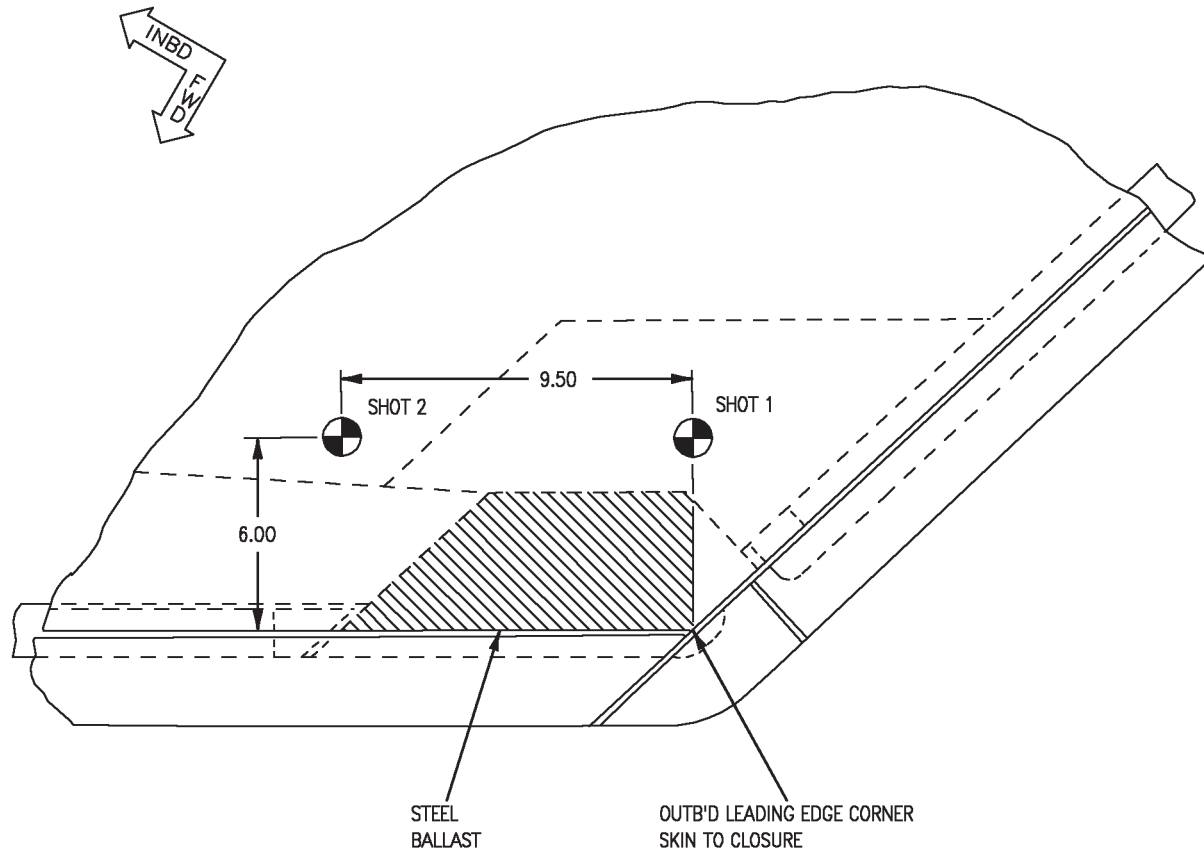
X-Ray Setup for Honeycomb Core Inspection and Locating Ballast (Sheet 3)
